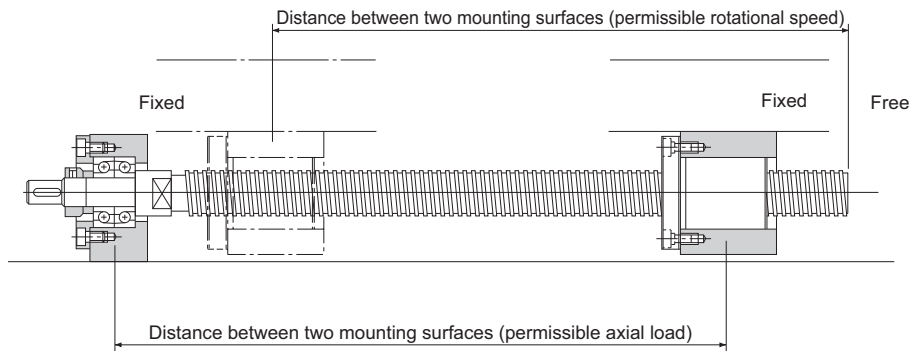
Screw Shaft Mounting Method: Fixed - Free
